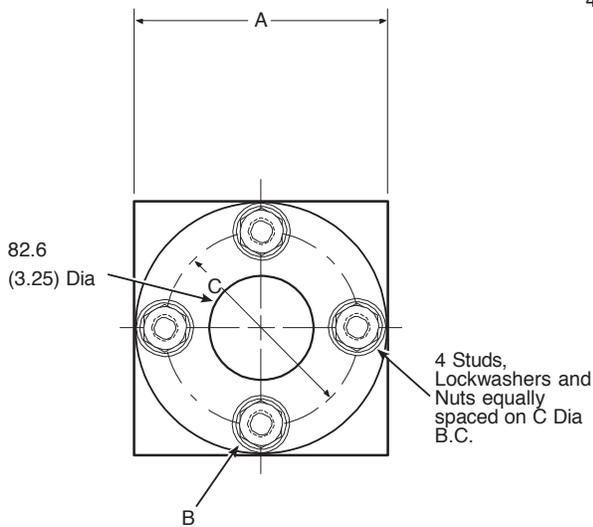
Hazardous Area Oxymitter 4000 Mounting Plate Dimensions
